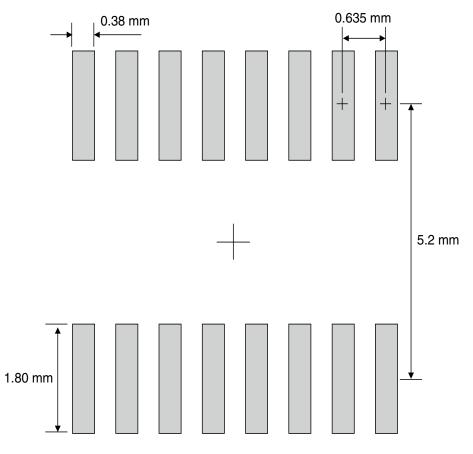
Pad size recommendation for SSOP16 Package (all dimensions in mm)
